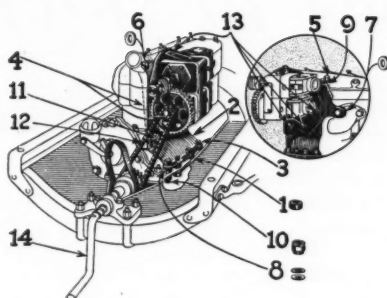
Gray & Davis starting and lighting units mounted on Ford car
